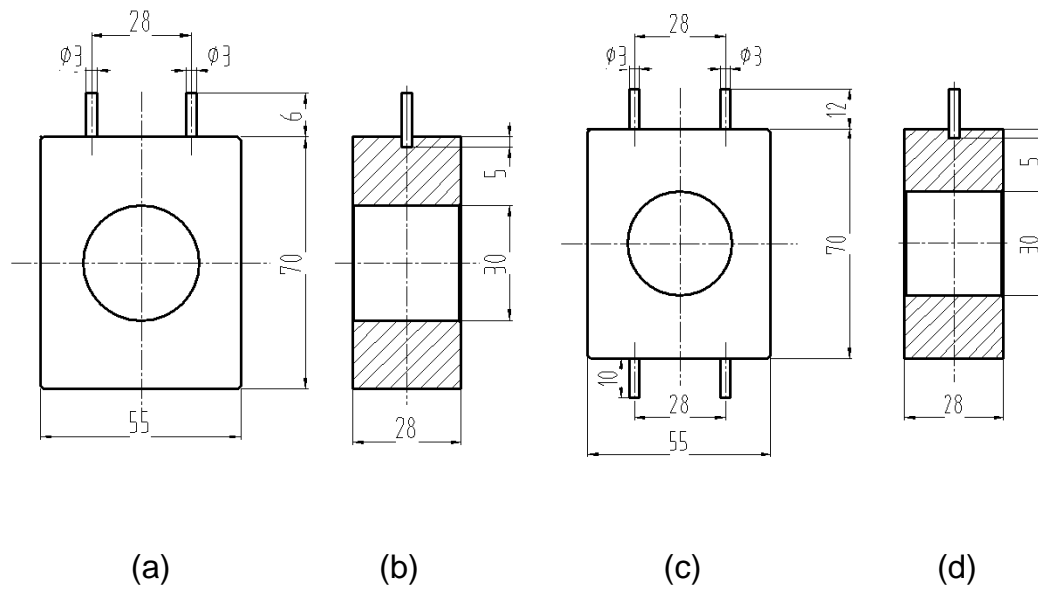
Bushings: (a) upper bushings; (b) cross-section of (a); (c) lower bushing; (d) cross-section of (c). (dimensions in mm)
